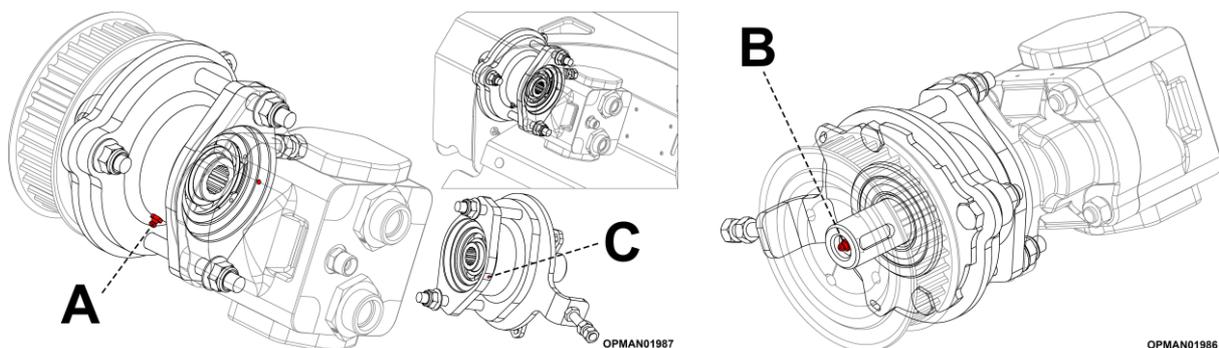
Powerdrive Pro Pulley Support Bearing Housing
